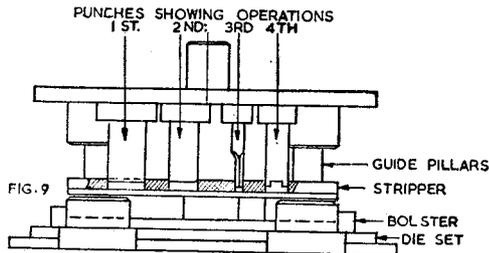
Front elevation of tools with the stripper in part section showing the punches. Front pillars taken away
